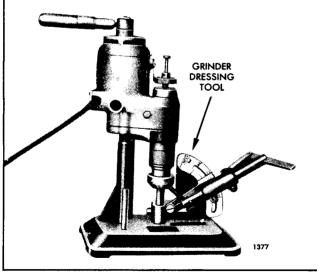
Grinding Wheel Dressing Tool of Set J 8165- 1
